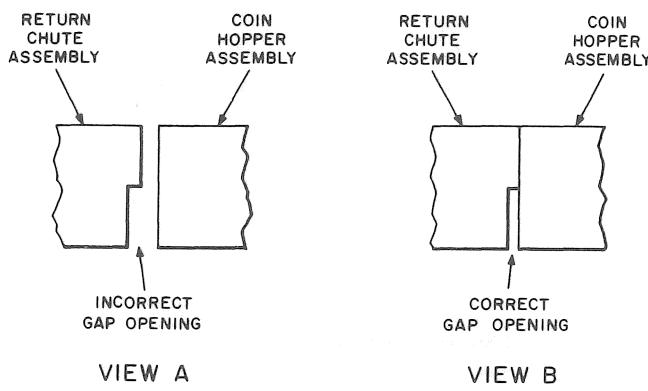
Relative Position of Return Chute Assembly and Coin Hopper Assembly As Viewed Down Hopper Throat
